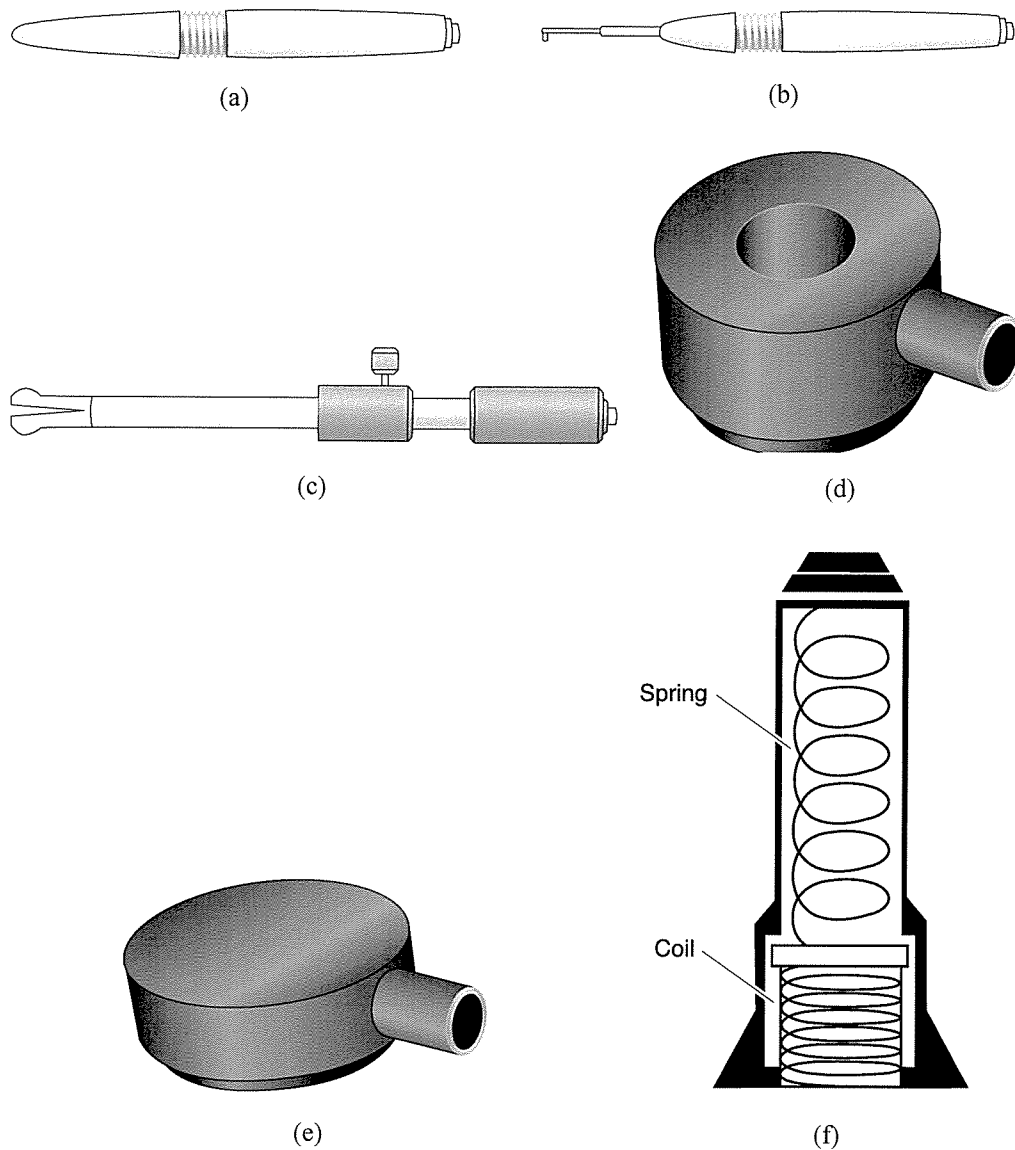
Typical surface coil configurations: (a) pencil probe, (b) 90° probe, (c) bolt hole probe, (d) fastener (doughnut) probe, (e) pancake probe, (f) spring-loaded surface coil.
